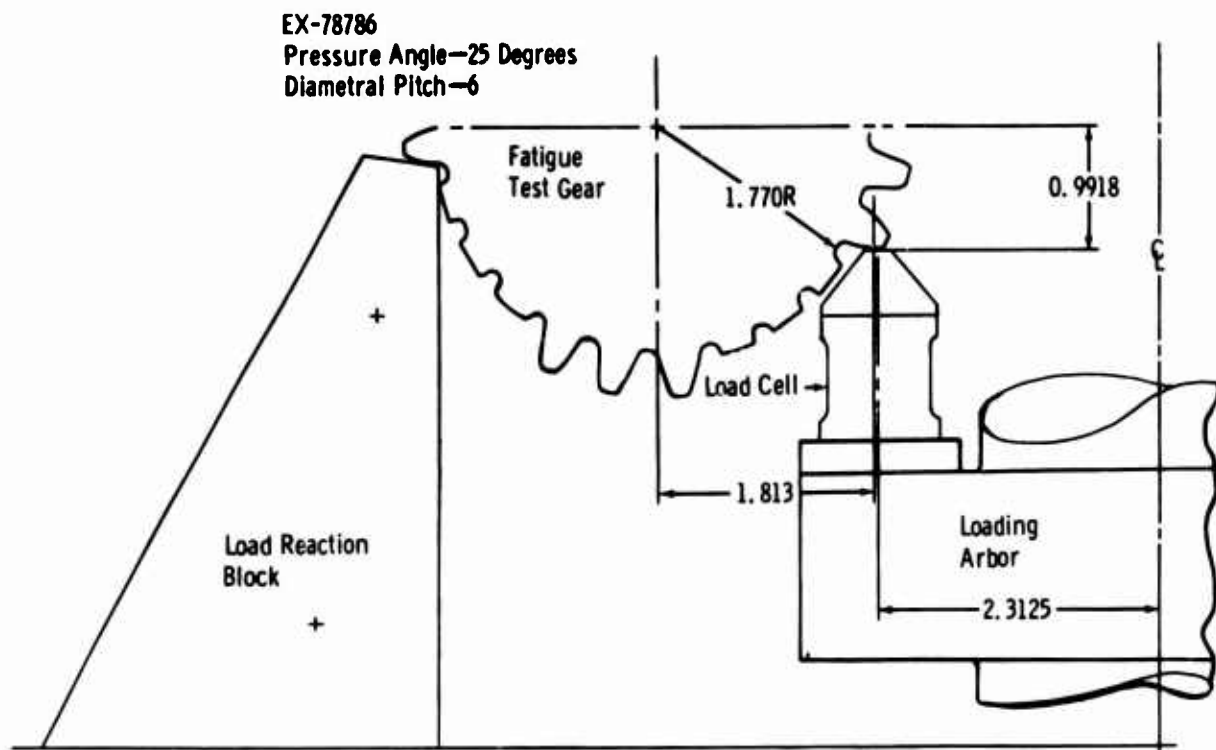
Typical Dimensions of 6-Pitch Gear Test Setup.
